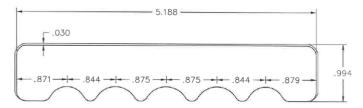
Fusion® Deck and Stair Board - Solid Cross Section
